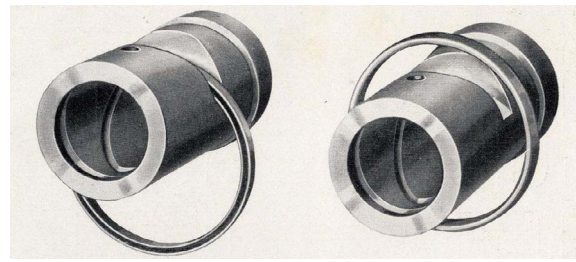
Type of Bearings Used on Diehl Polyphase Induction Motors
